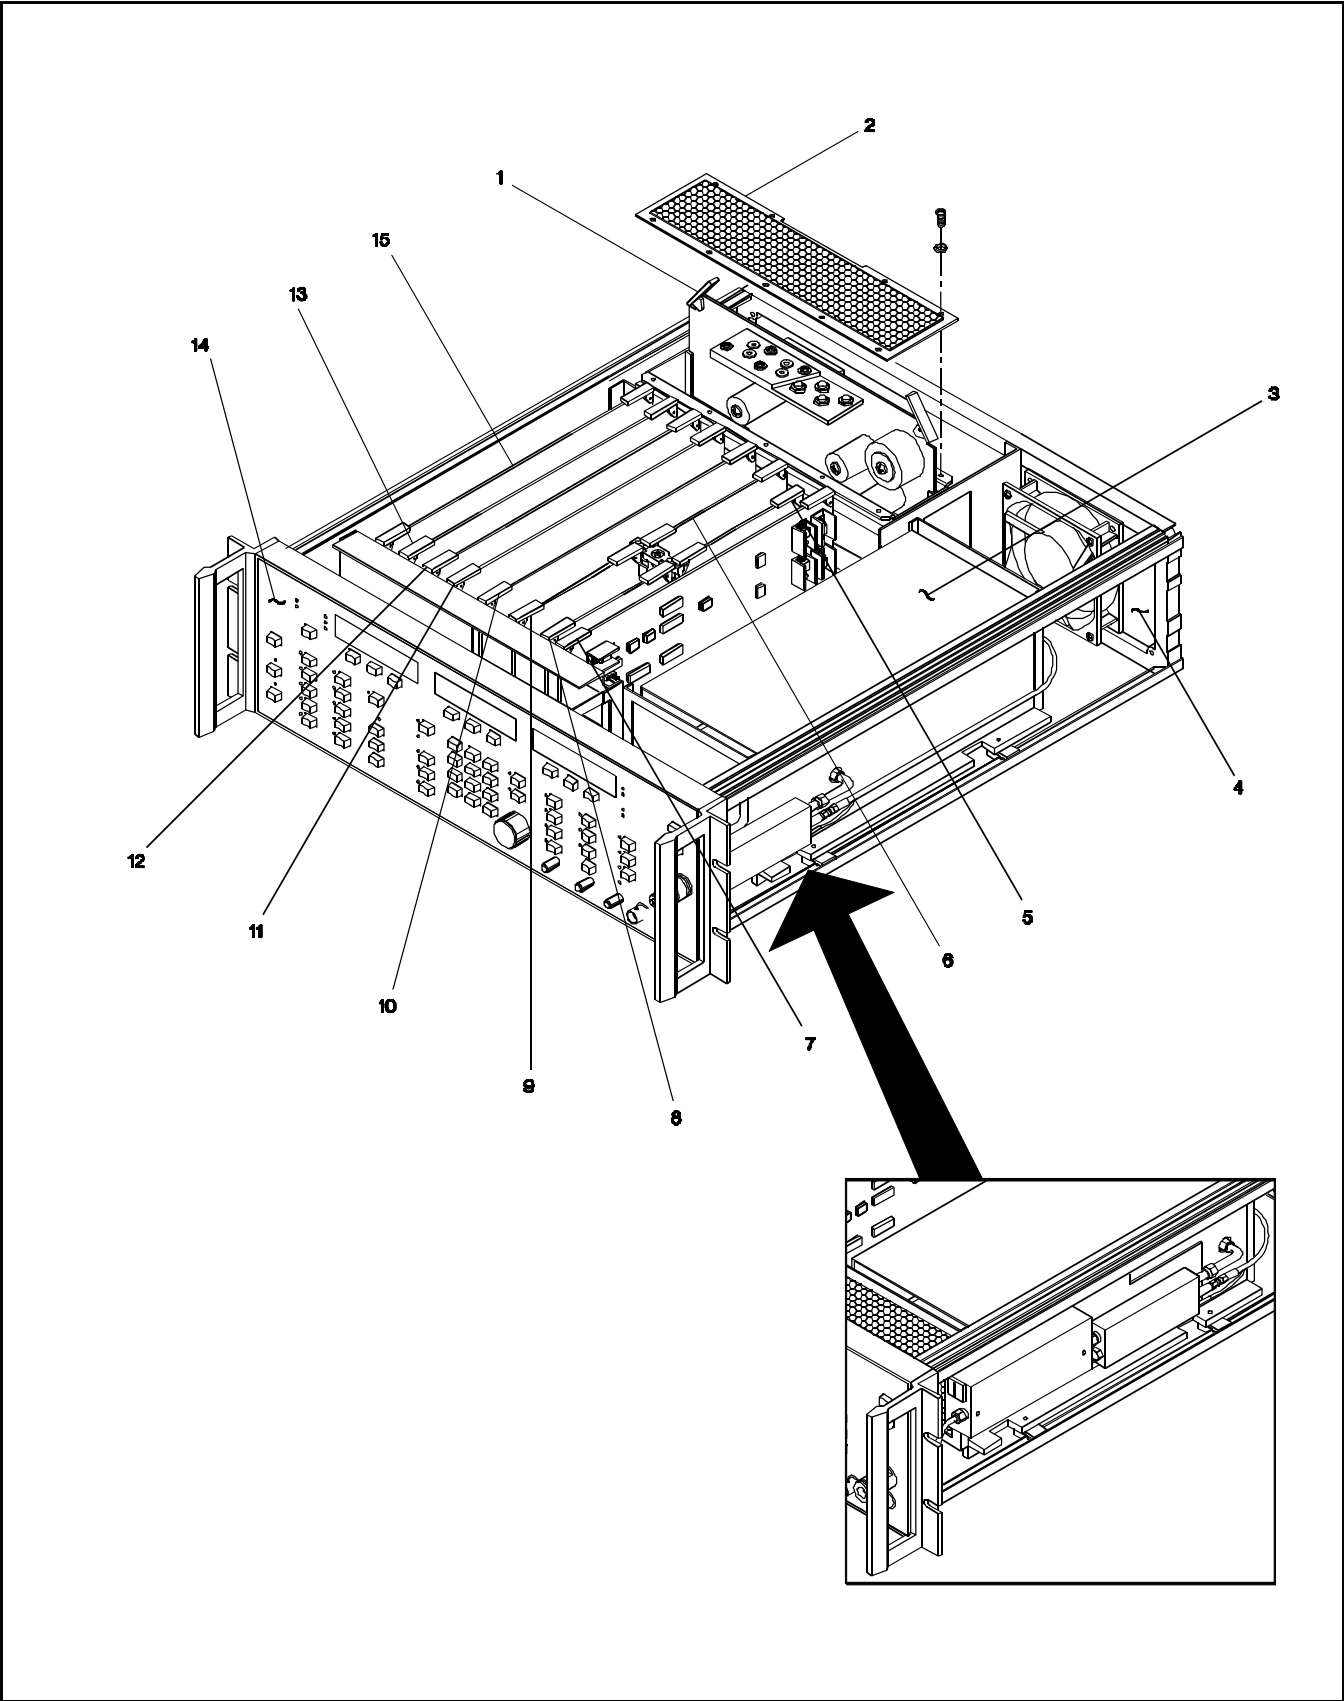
A1 Basic Frame Assembly Parts (2 of 4)
